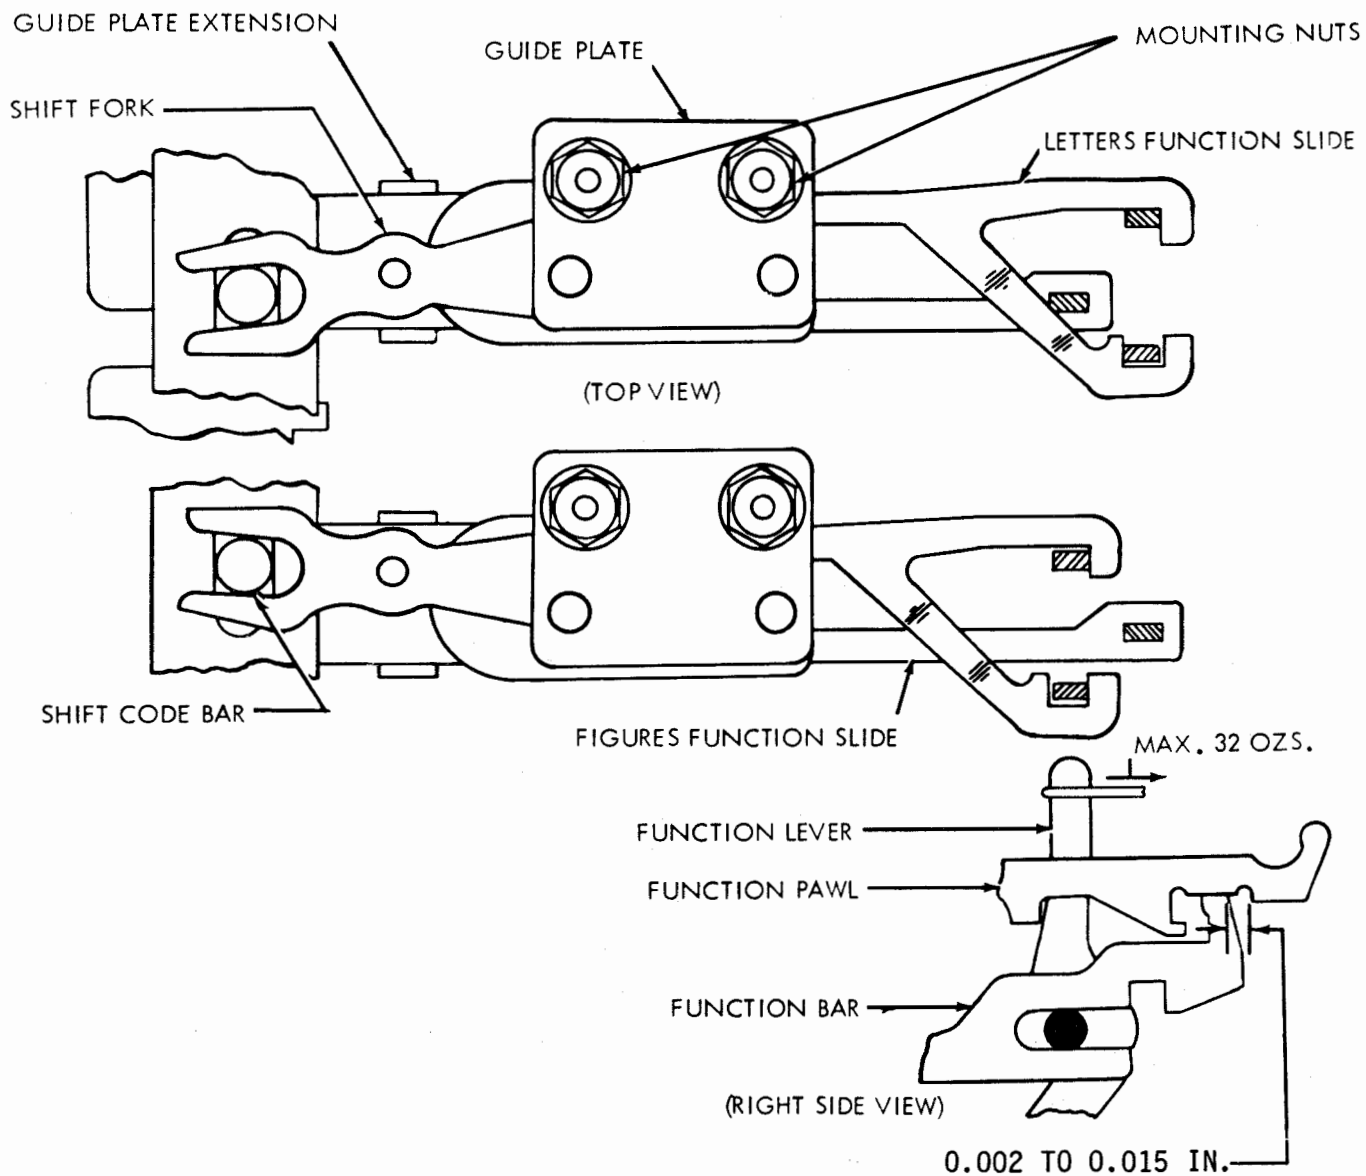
Figures-Letters Shift Code Bar Operating Mechanism
